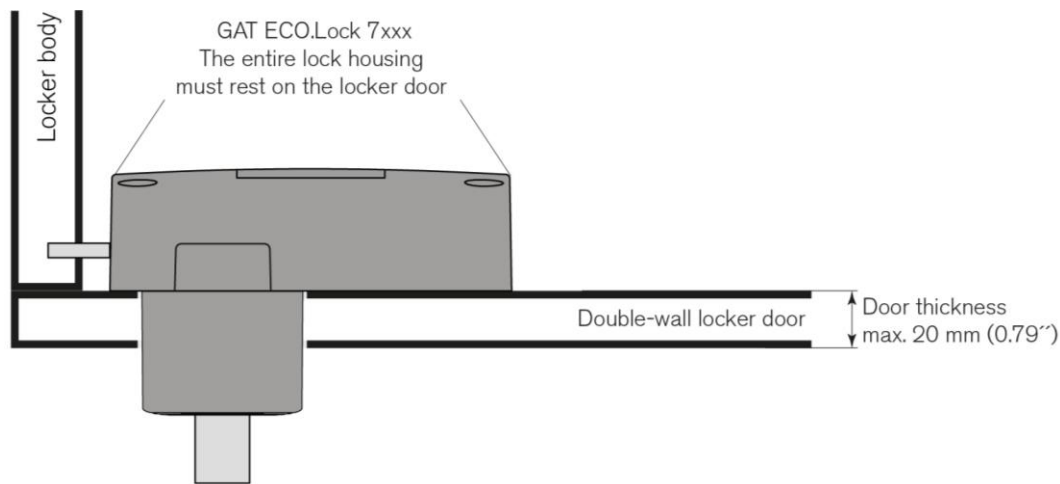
Installation of the GAT ECO.Lock on a double-wall metallic door
